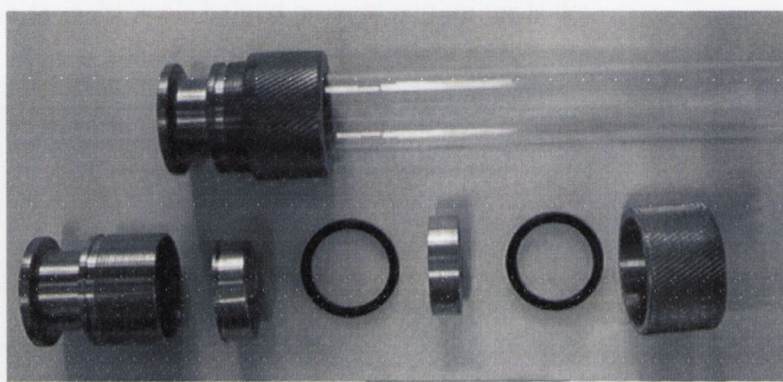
Image showing brass NW25 QF adaptor for the quartz furnace-tube. The Adaptor consists of a compression fitting containing a brass gasket sandwiched between two rubber O-rings.
